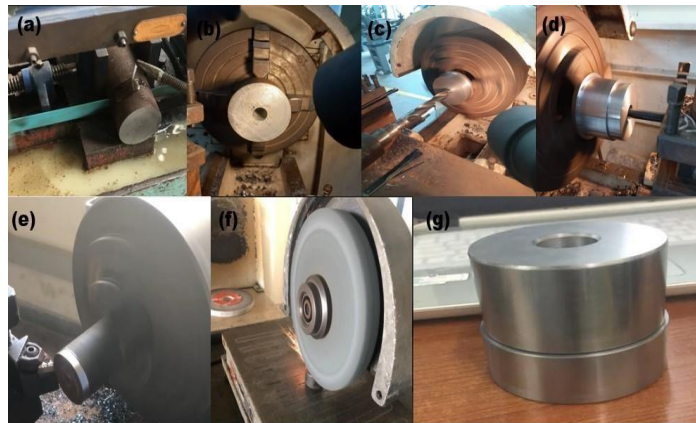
Representation of (a) Power hack saw (b) Facing (c) Drilling (d) Boring (e) Turning (f) Grinding operations employed to machine the raw material (g) Die block after the machining process.
